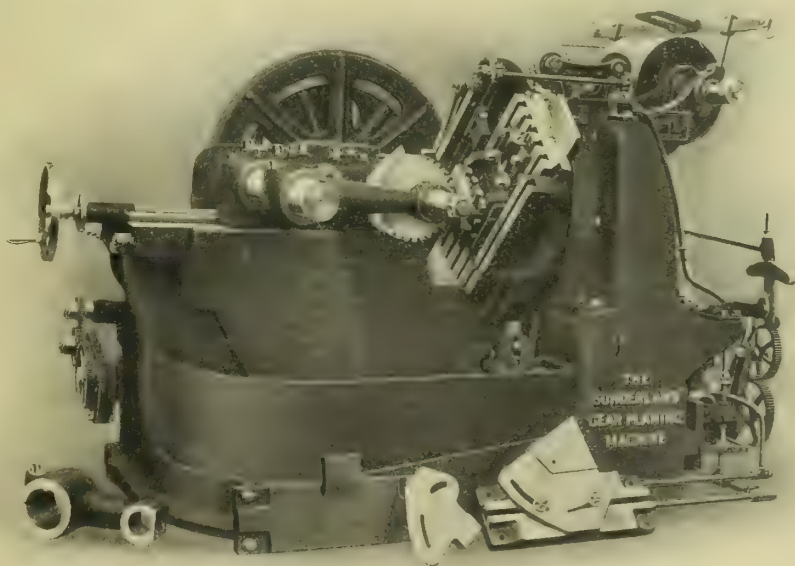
"SUNDERLAND" GEAR PLANNER CUTTING SPIRAL GEARS. MESSRS. PARRINSON & SON, SHIPLEY.
